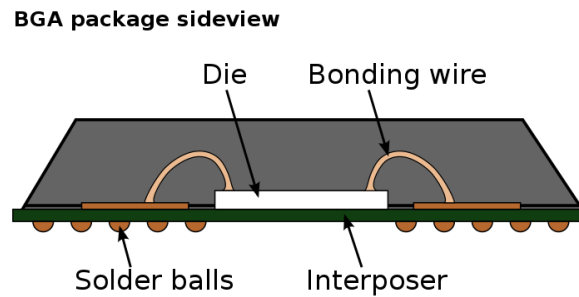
Side view of a schematic representation of a BGA package [61]
